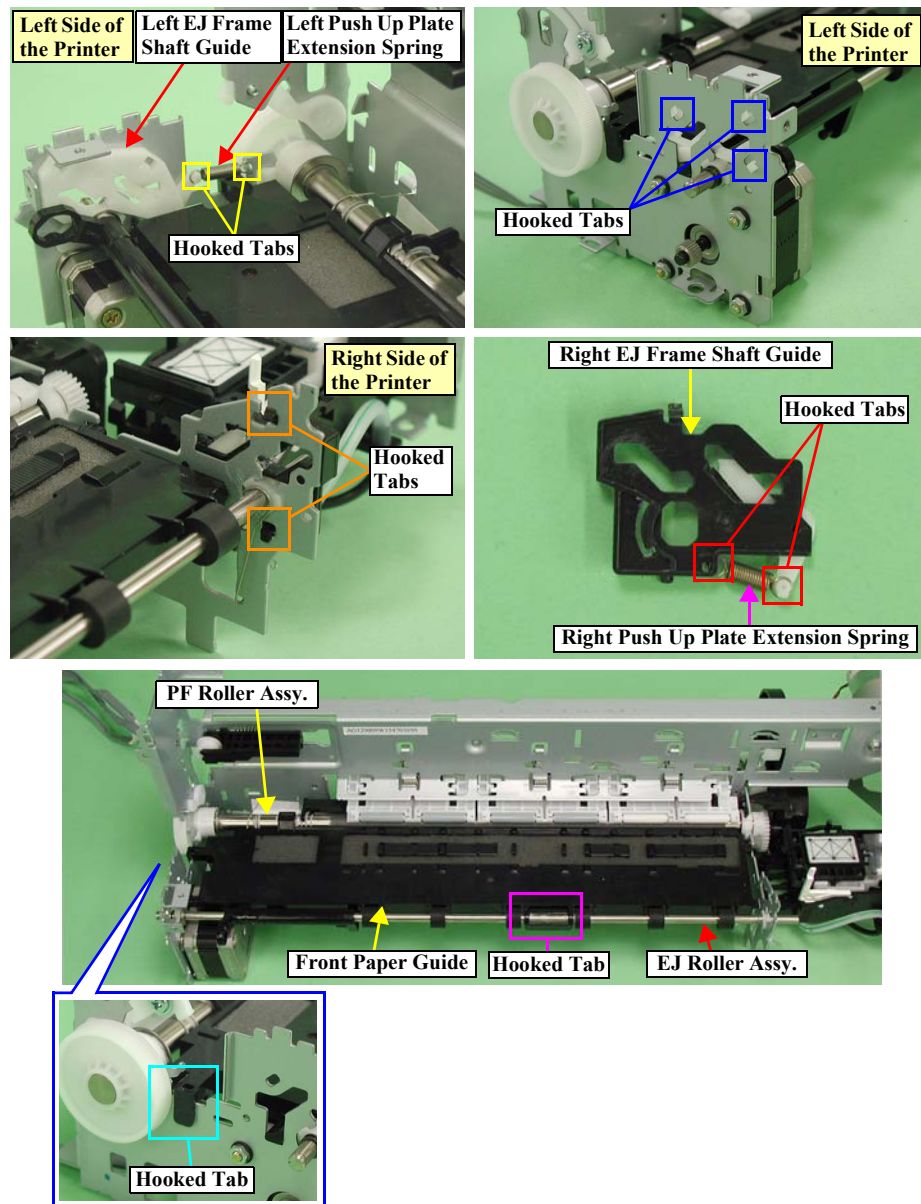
Removing the Front Paper Guide and EJ Roller Assy. (2)
